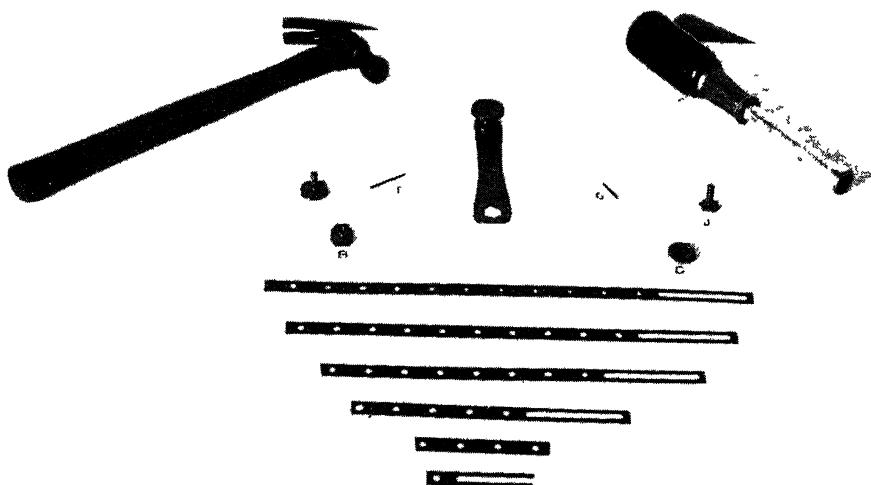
Parts of the Floore Radial Intersector and tools used in its assembly.
